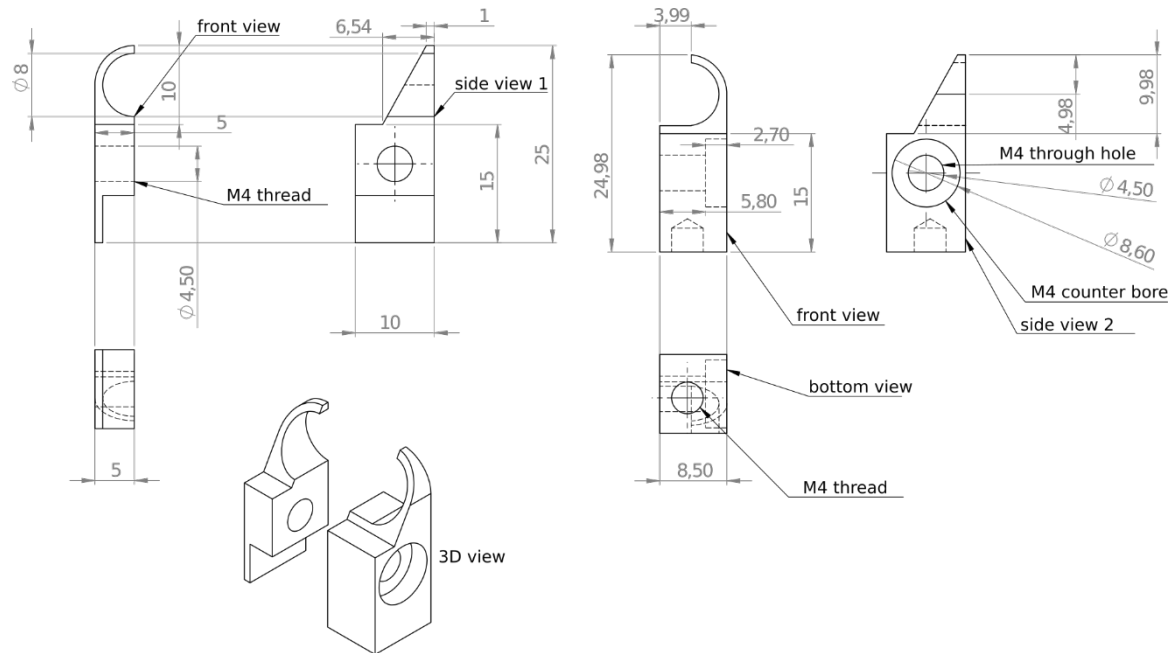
Construction drawings for the two parts of a holder for the two elliptical mirrors. For mounting a mirror, it is clamped between these two parts using the M4 thread and counter bore. Then it is mounted on a post using the M4 thread at the bottom of the piece. [Dimensions in mm]
